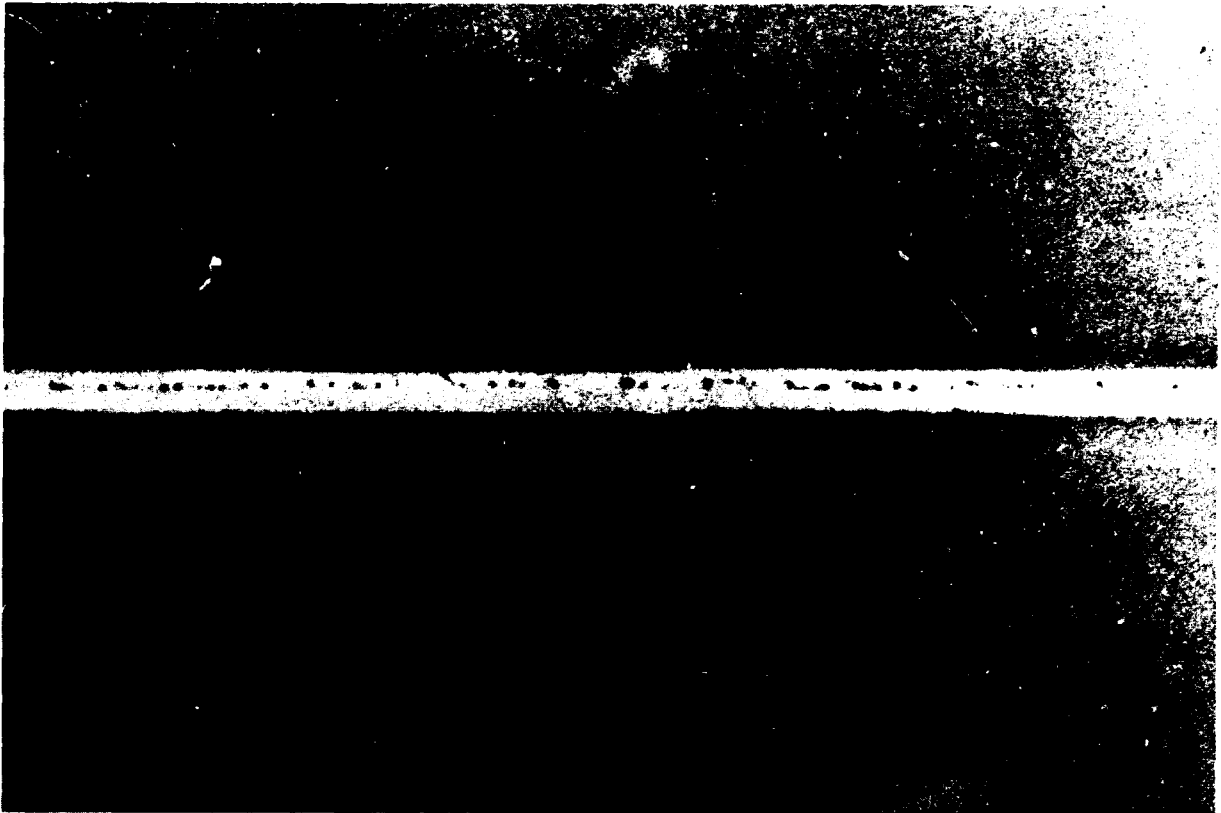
Radiograph of a 1.5 mm thick Al weld taken at 25 kV with a beryllium window X-ray tube.
